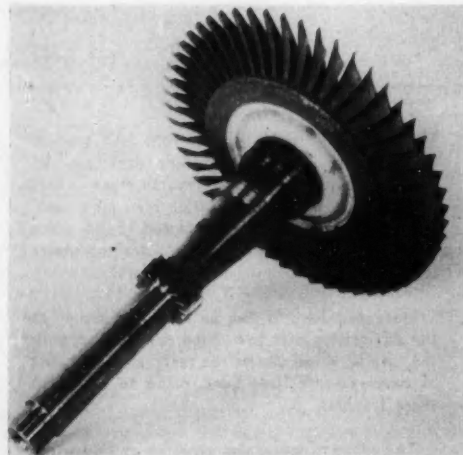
Second-stage turbine wheel—after 563 hr endurance. This wheel and rest of engine successfully completed standard Navy diesel engine proof test
